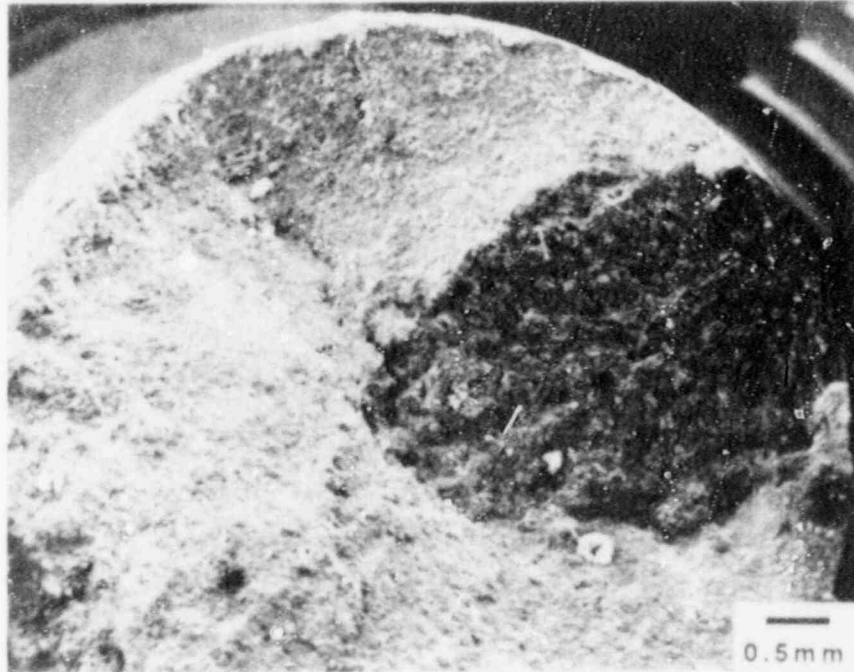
Fracture Surface of an Al06B Ferritic Steel CERT Specimen.
